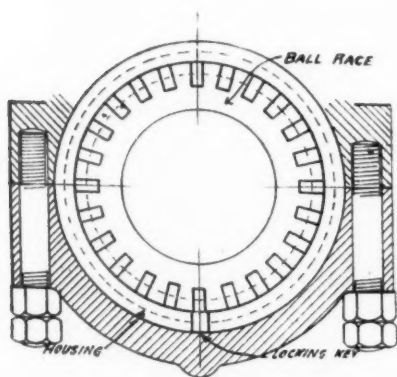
Method for locking adjustment of bearings shown in Fig. 8; Fig. 10—Method of mounting worm wheel on roller bearings with ball thrusts, and Fig. 11—Staggered balls in old thrust race to prevent uneven wear
